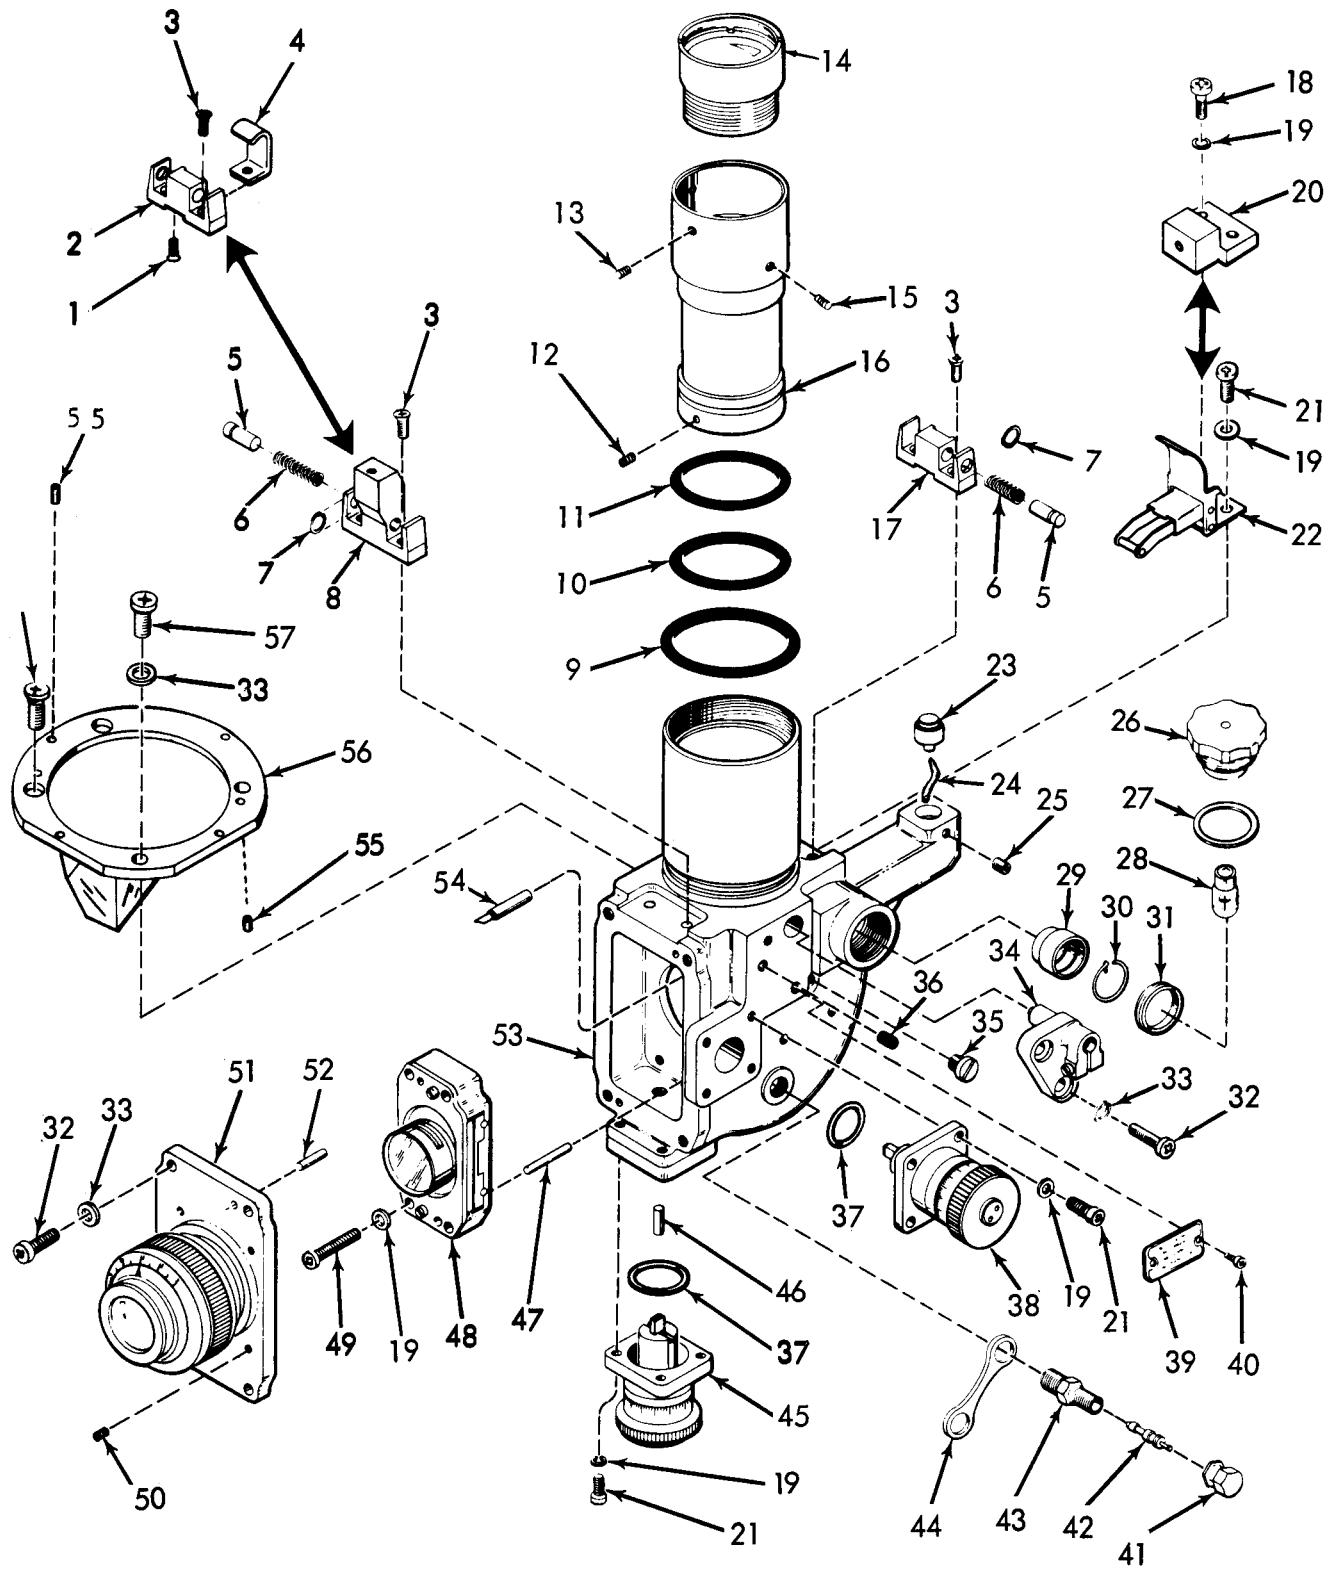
Body assembly (daylight) 11747350 and 10516576, and Optical cell assembly 8289278
